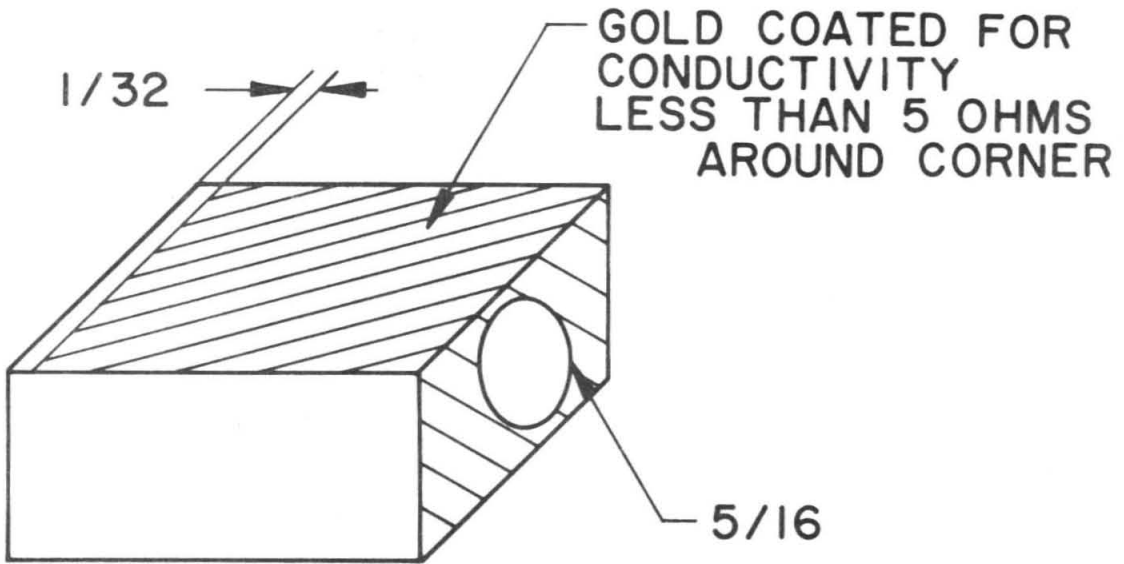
Configuration of sample electrode coating. Dimensions are in inches.
